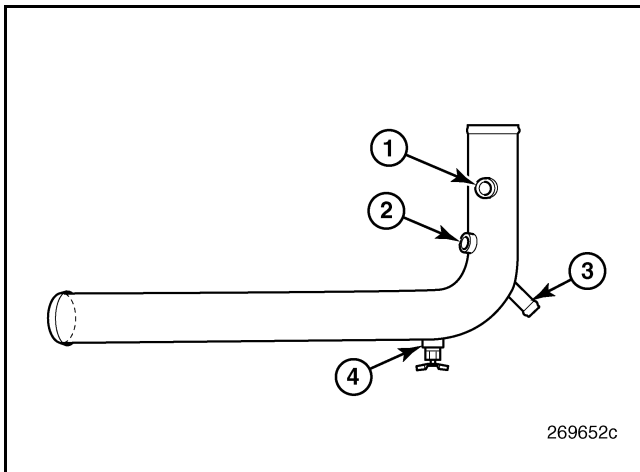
Radiator Lower Tube with Welded Bosses (Spuds) for Heater Hose Connections (CH Lower Tube Shown)
